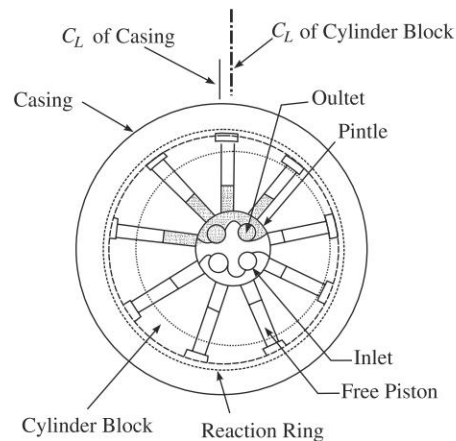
Radial piston pump (rotating cylindrical block type)
